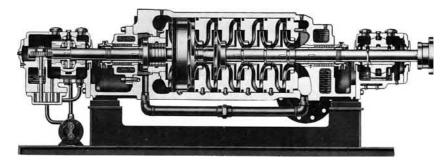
Multistage pump with single-suction impellers facing in one direction and hydraulic balancing device.
